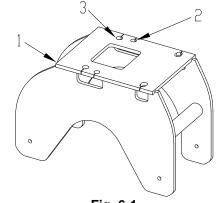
1) Flat Top Mounting Frame, 2) "IN1" Mounting Holes, 3) "IN2" & "XR" Mounting Holes
